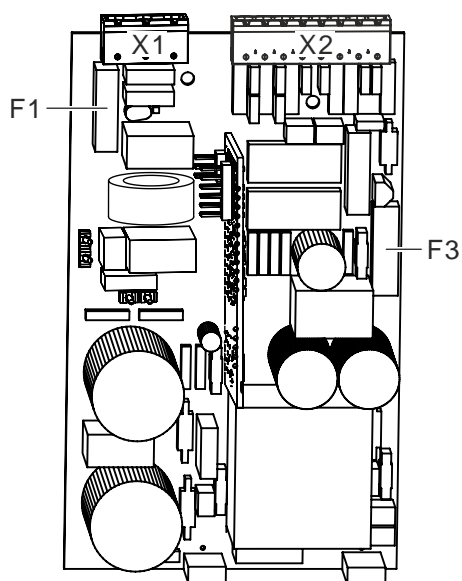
View of PCB FP2015-A1 power supply (70 W)
